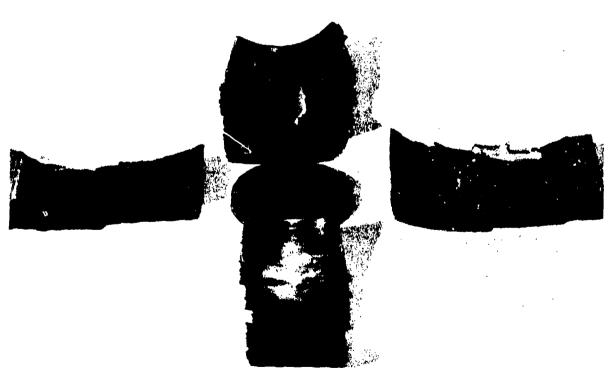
SCB Test Result, Mild Explosion. (Neg. LHL 184531)
